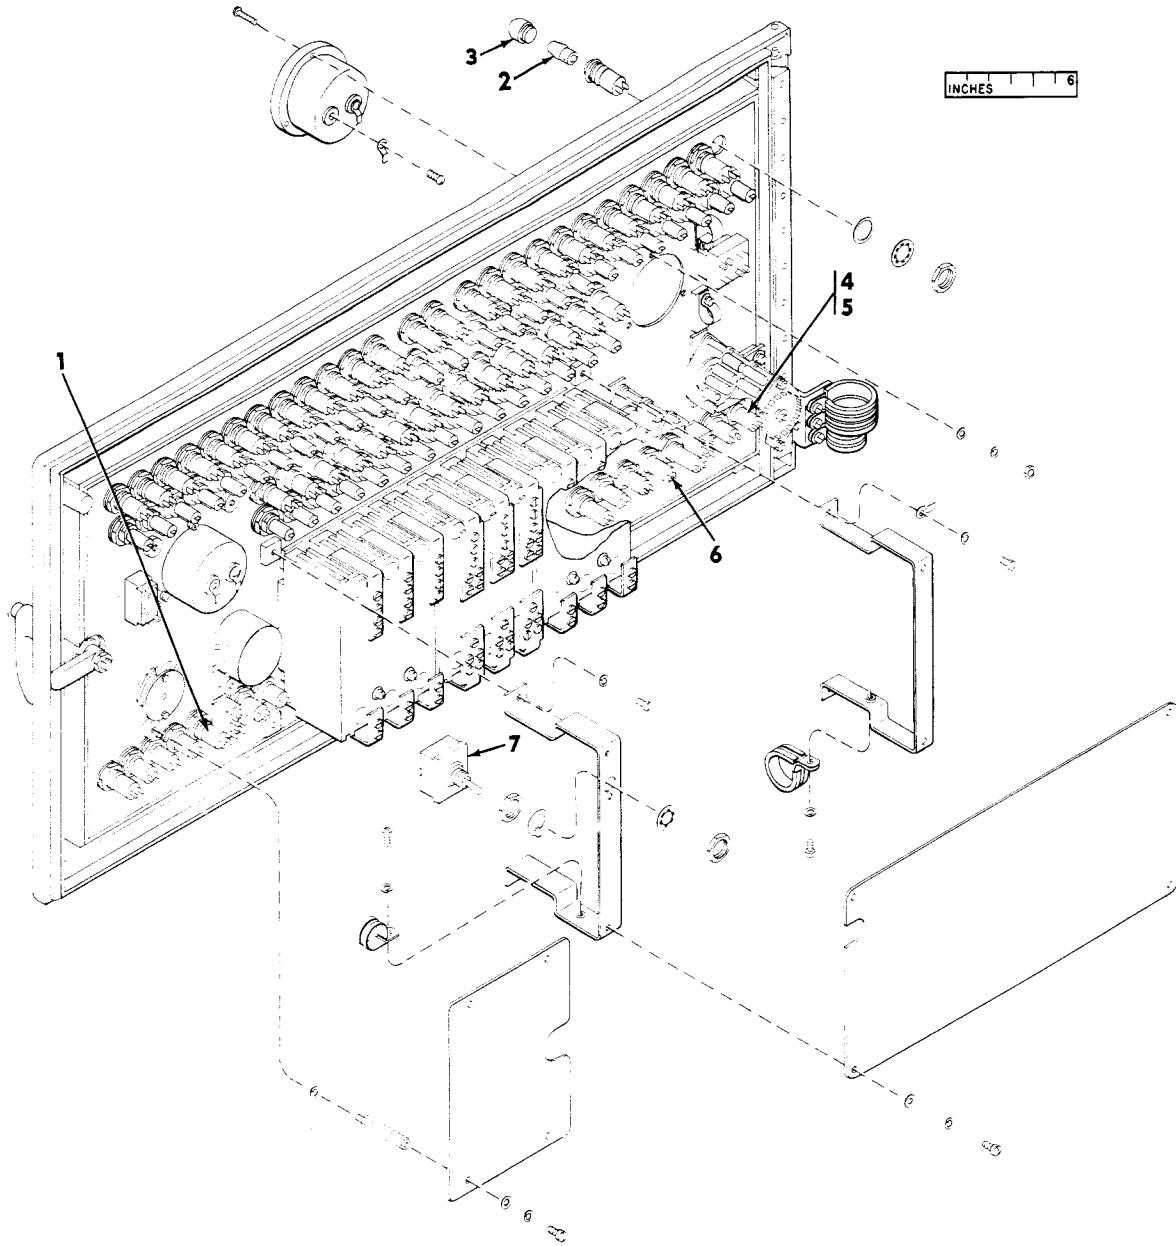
Power supply PP-1178/M (7621591)—exploded view
